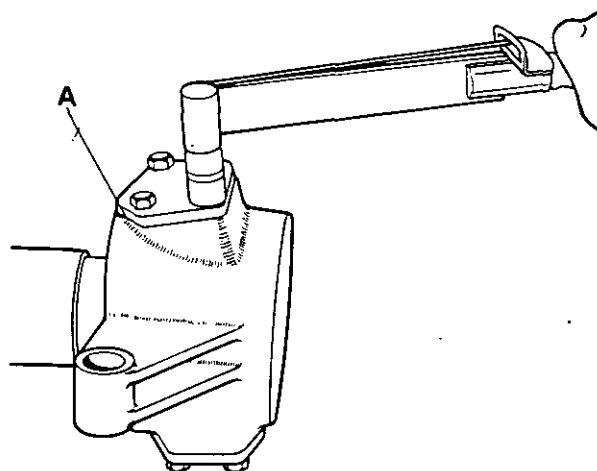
TIGHTENING SWIVEL HOUSING BEARING PLATE
